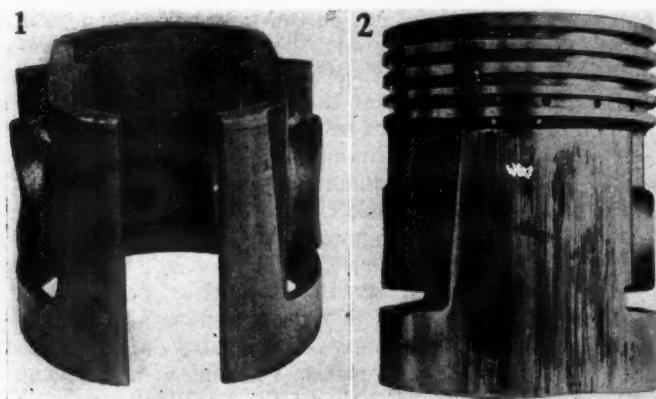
Cutaway piston used in tests to determine how soon after engine starts oil reaches cylinder walls
